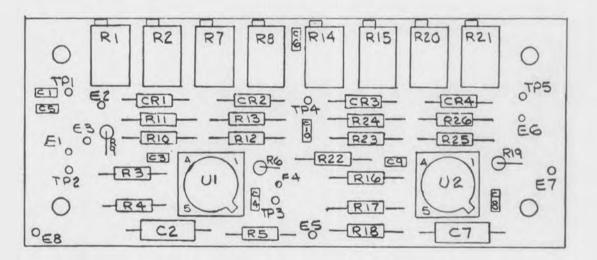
A2, Dual Shaper Board, Component Location Drawing
